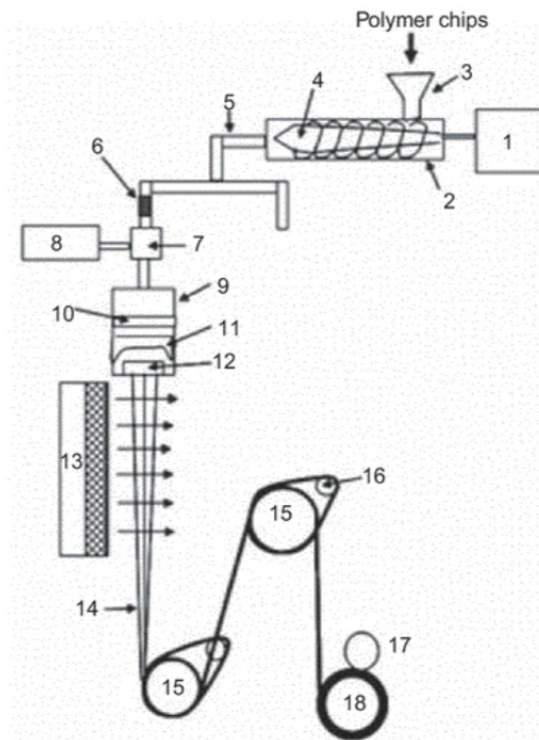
Schema of melt spinning setup: (1) extruder drive, (2) extruder, (3) hopper, (4) screw, (5) manifold, (6) static mixer, (7) gear pump, (8) gear pump drive, (9) spin pack, (10) mesh filters, (11) distributor, (12) spinneret, (13) quench chamber, (14) freshly spun yarn, (15) godet, (16) idler roller, (17) winder, (18) yarn bobbin* [13]
